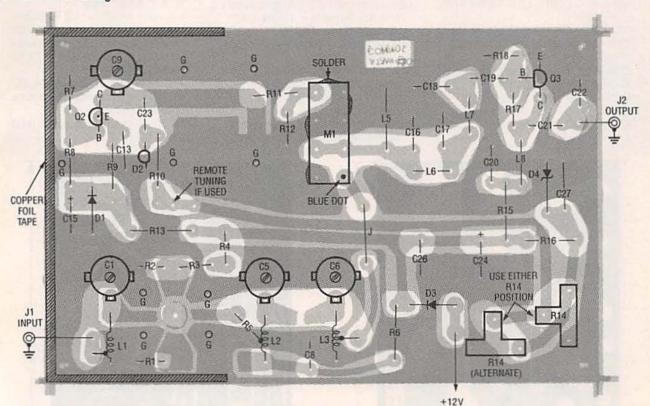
PARTS-PLACEMENT DIAGRAM. This layout must be followed exactly to duplicate the performance of the downconverter. Some components mount on the solder side of the board as shown in Fig. 6.
